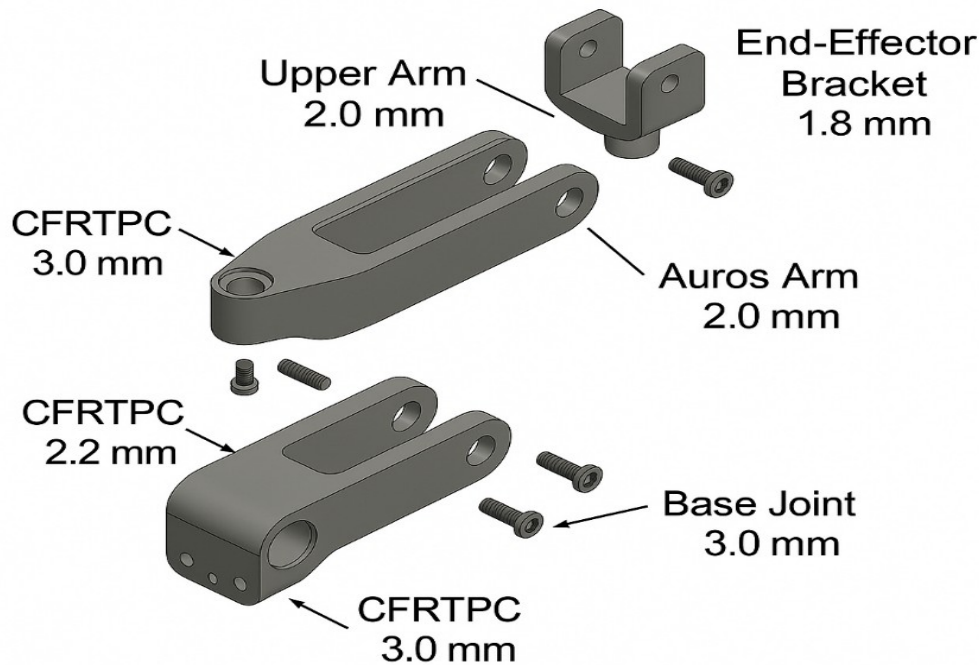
Exploded CAD Assembly of the Robotic Arm Components
